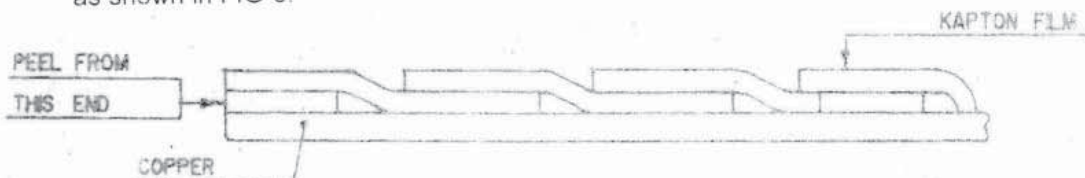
SHOWING THE CORRECT END OF WIRE FOR PEEL TEST
